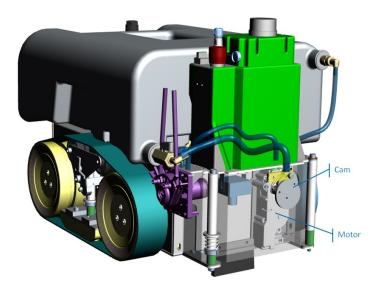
Mechanical design of the 2.1 Tool raising/lowering mechanism
